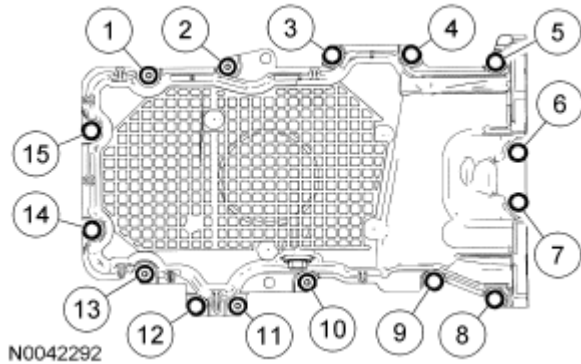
Identifying Tightening Sequence Of Oil Pan-To-Engine Bolts
